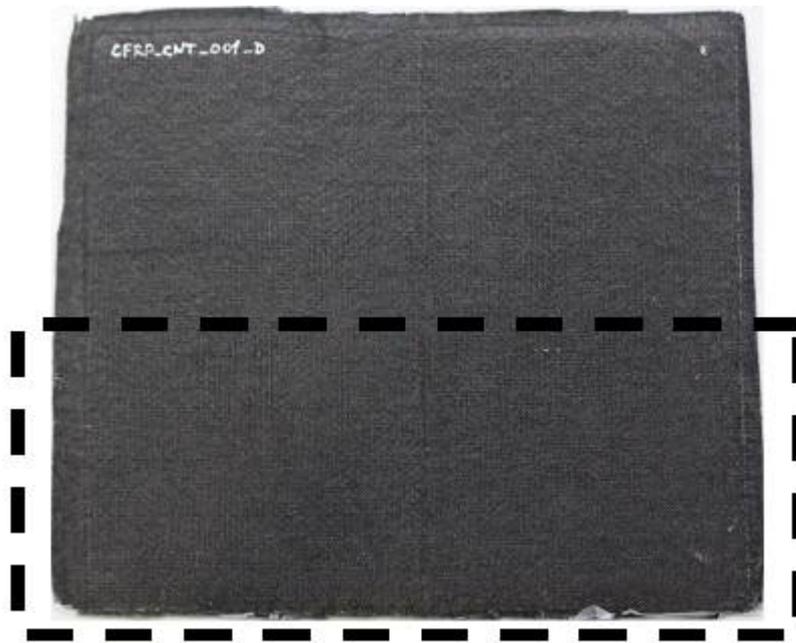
Manufactured CFRP blank. Dashed area shows the position of the Teflon insert
